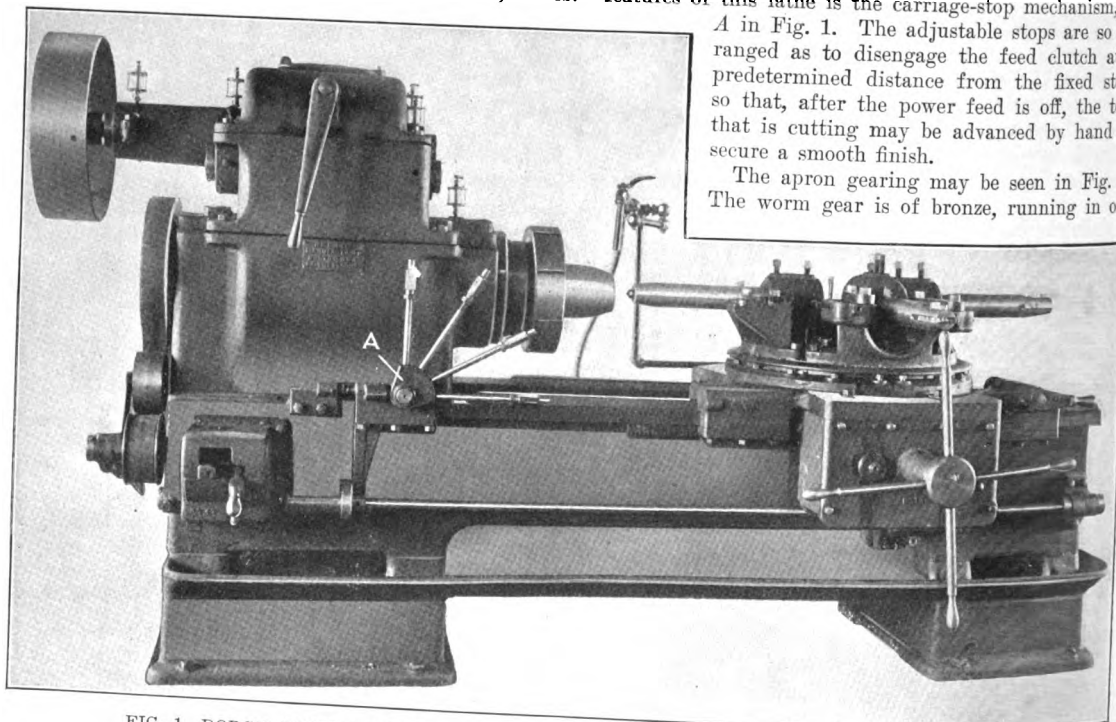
DODGE SPECIAL-PURPOSE LATHE FOR MACHINING OPERATIONS ON 6-IN. SHELLS
